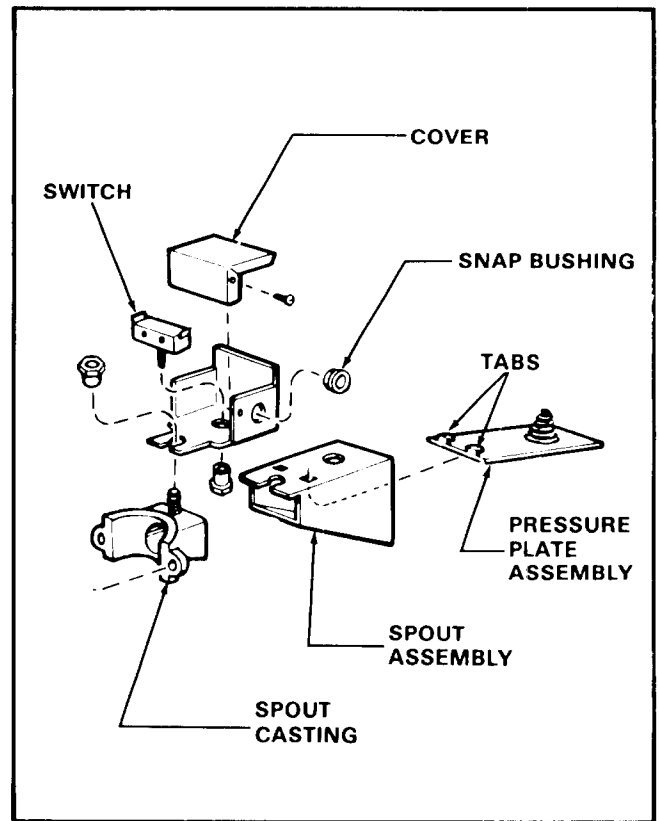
Removal of the Limit Switch, Pressure Plate, Spout and Spout Casting.
